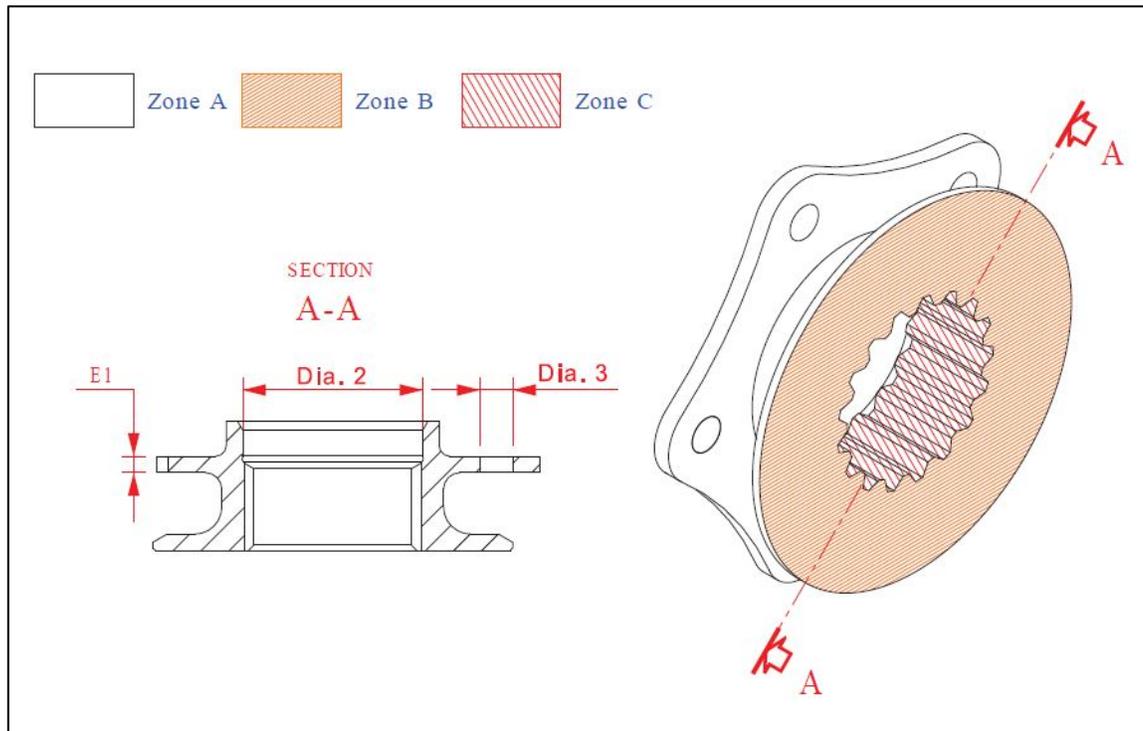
to paragraph (i)(1) – Inspection Areas of Tail Rotor Splined Flange
